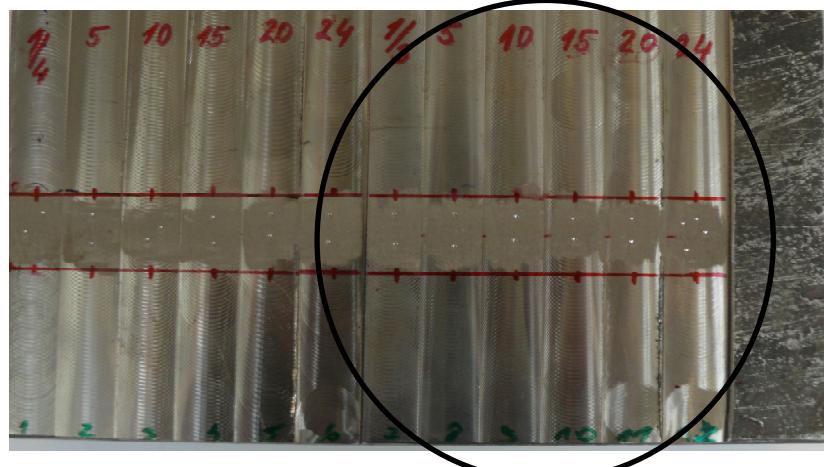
Mechanized material 12 050.1 with setting out of tested surfaces
